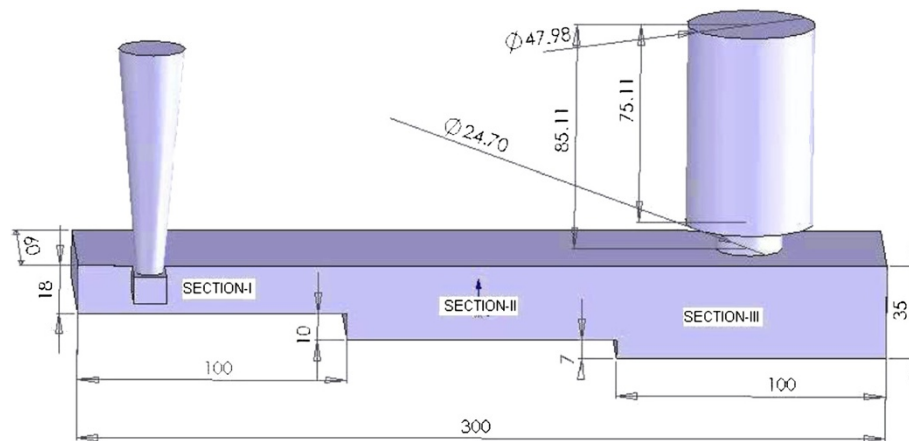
Benchmark model of the stepped casting (dimensions in mm) (Behera et al. 2012).
